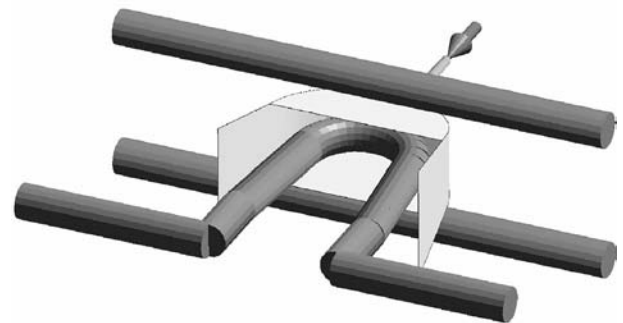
Insert fabricated by EBM with 1 mm machinery allowance
